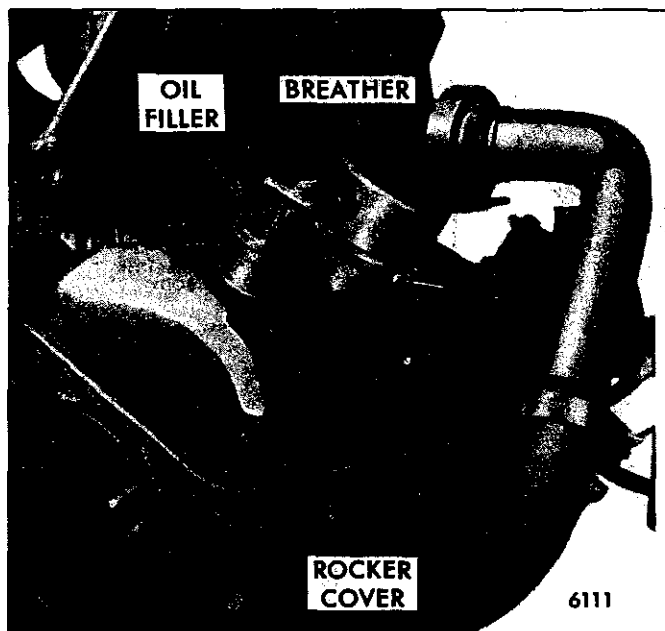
Rocker Cover Breather Mounting (6V-53 Engine)
